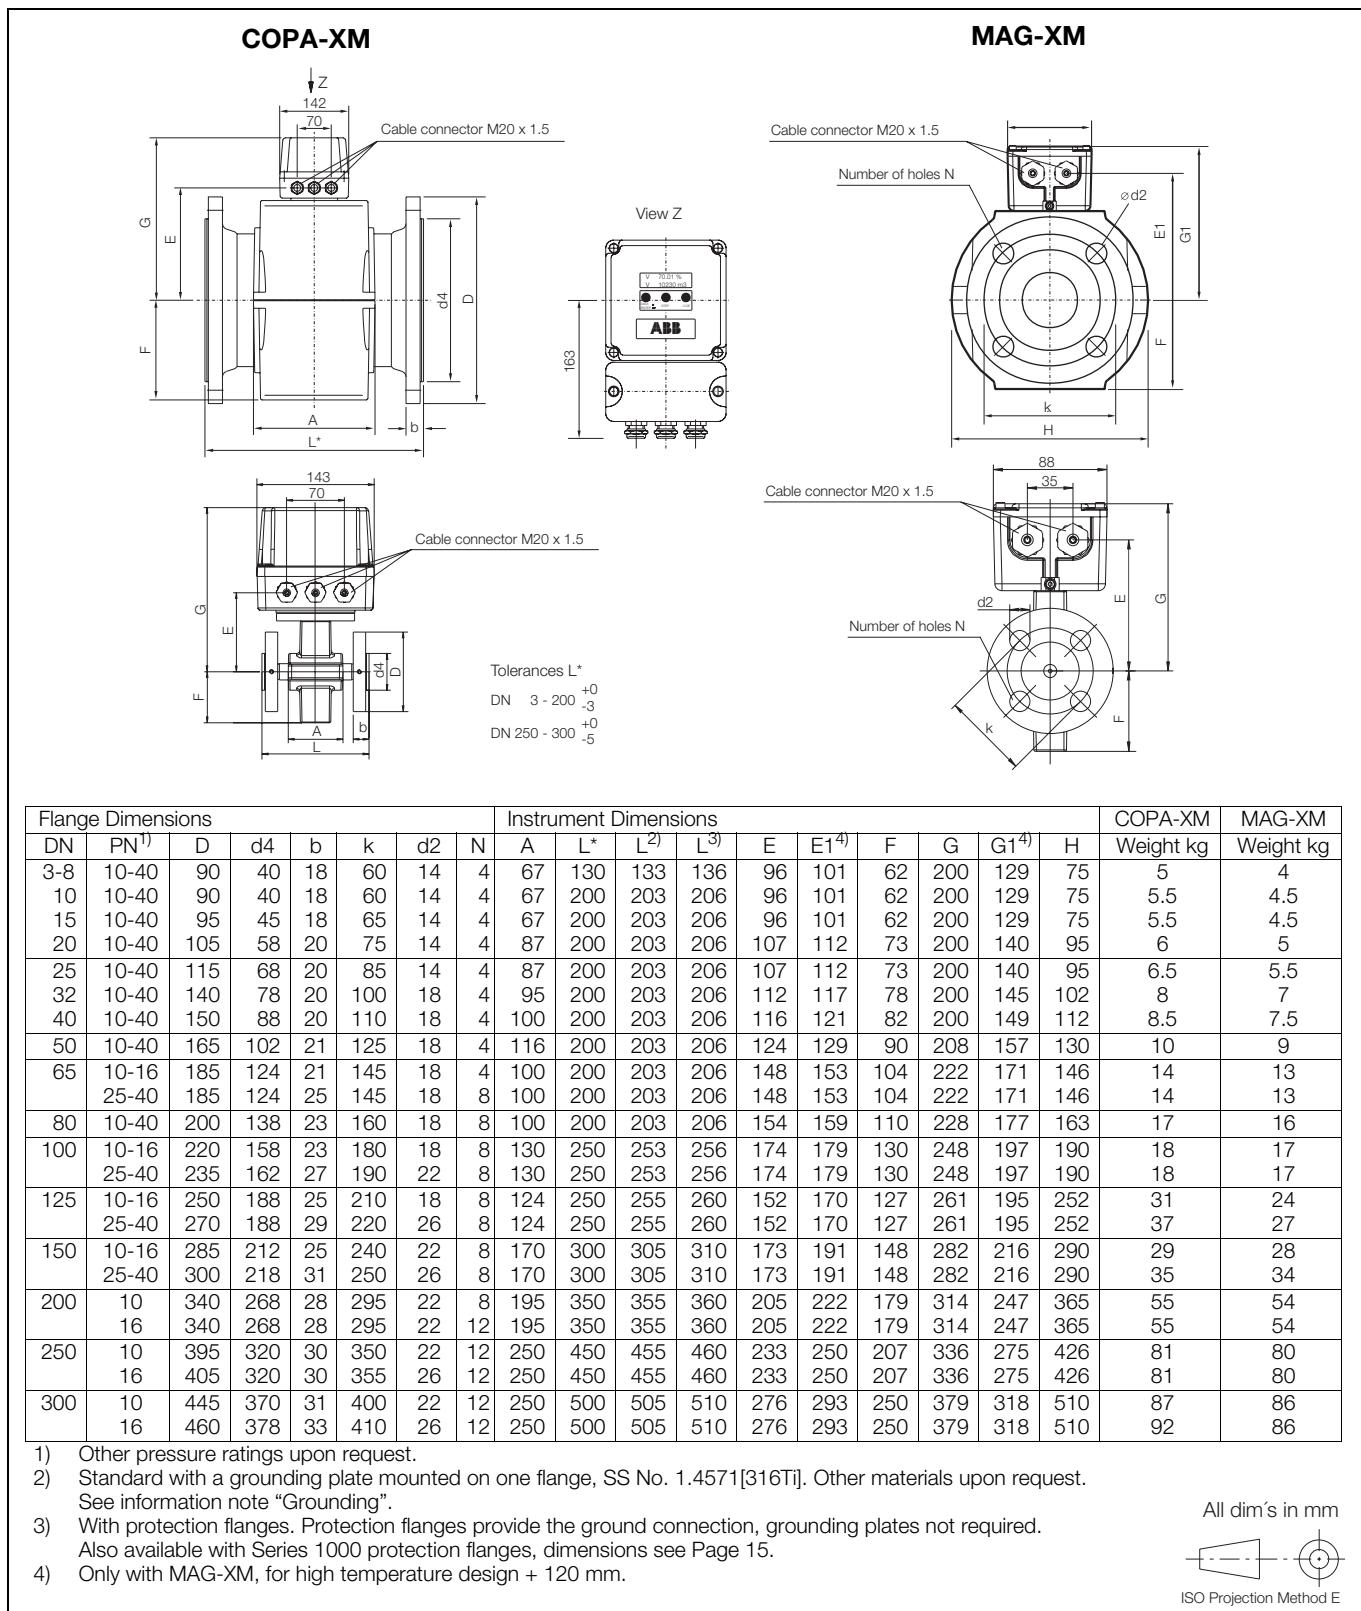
Flowmeter Primaries DN 3 to DN 300, DIN Flanges
